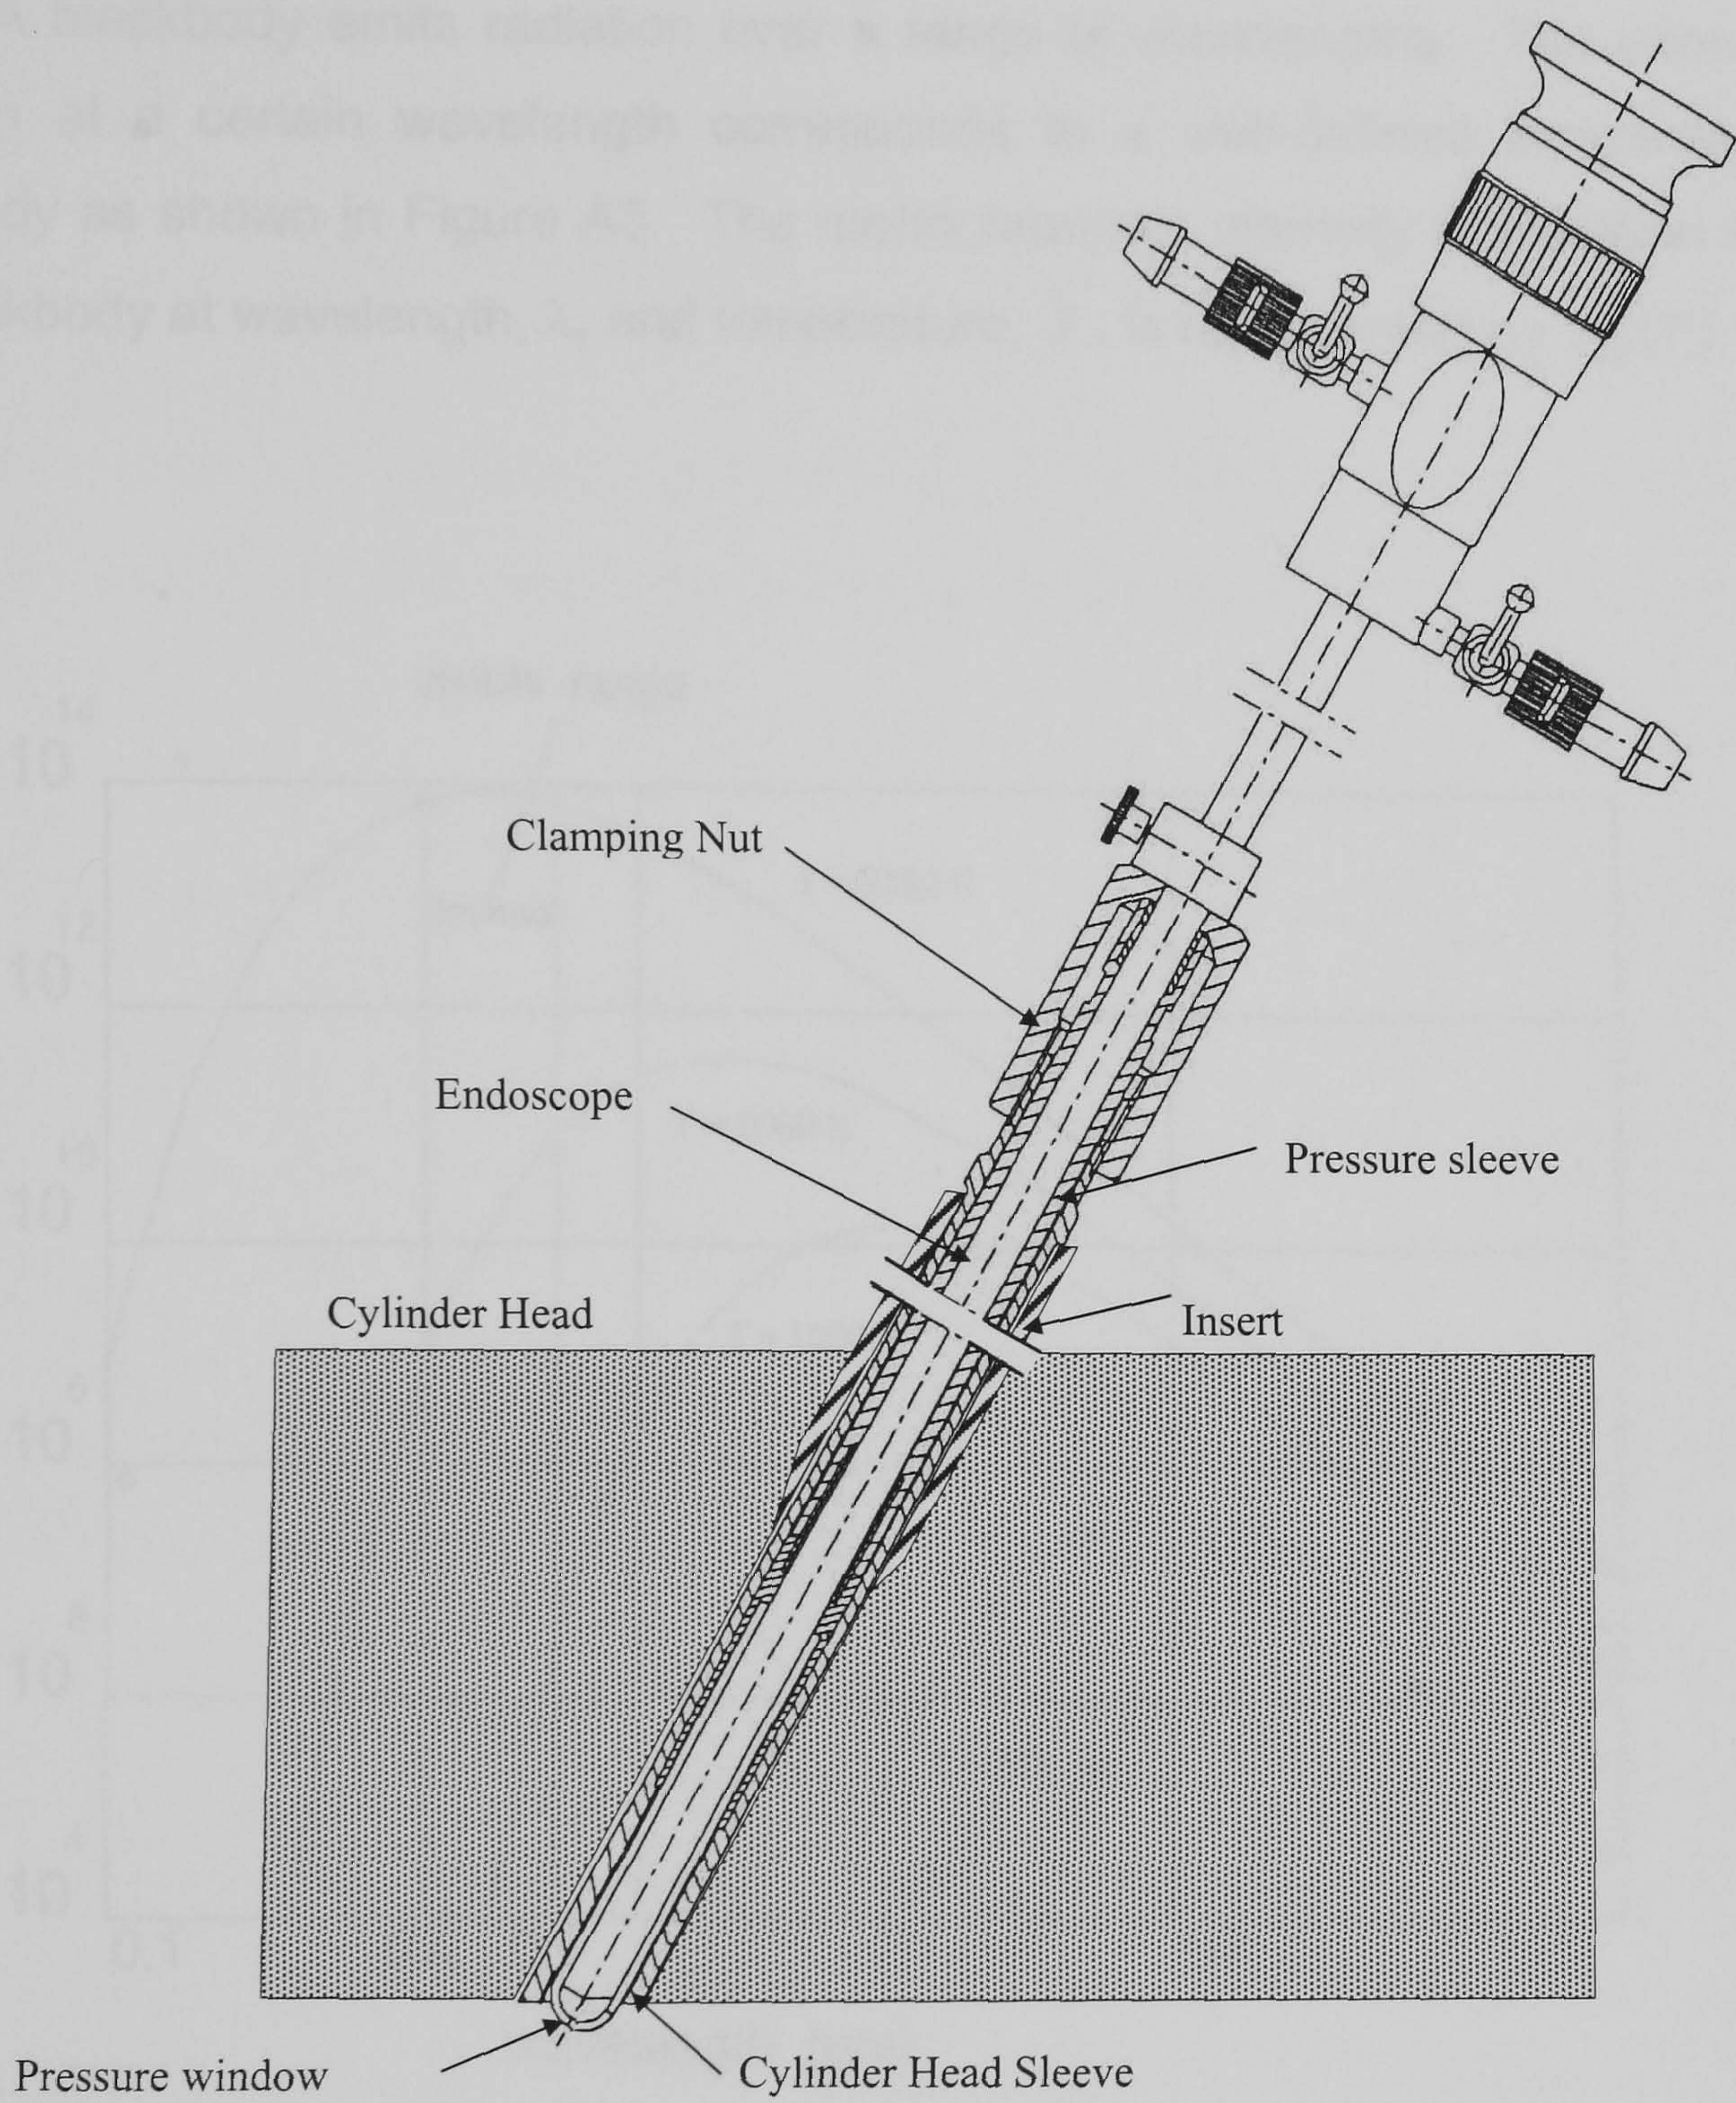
Drawing showing a fully assembled endoscope in the cylinder head
